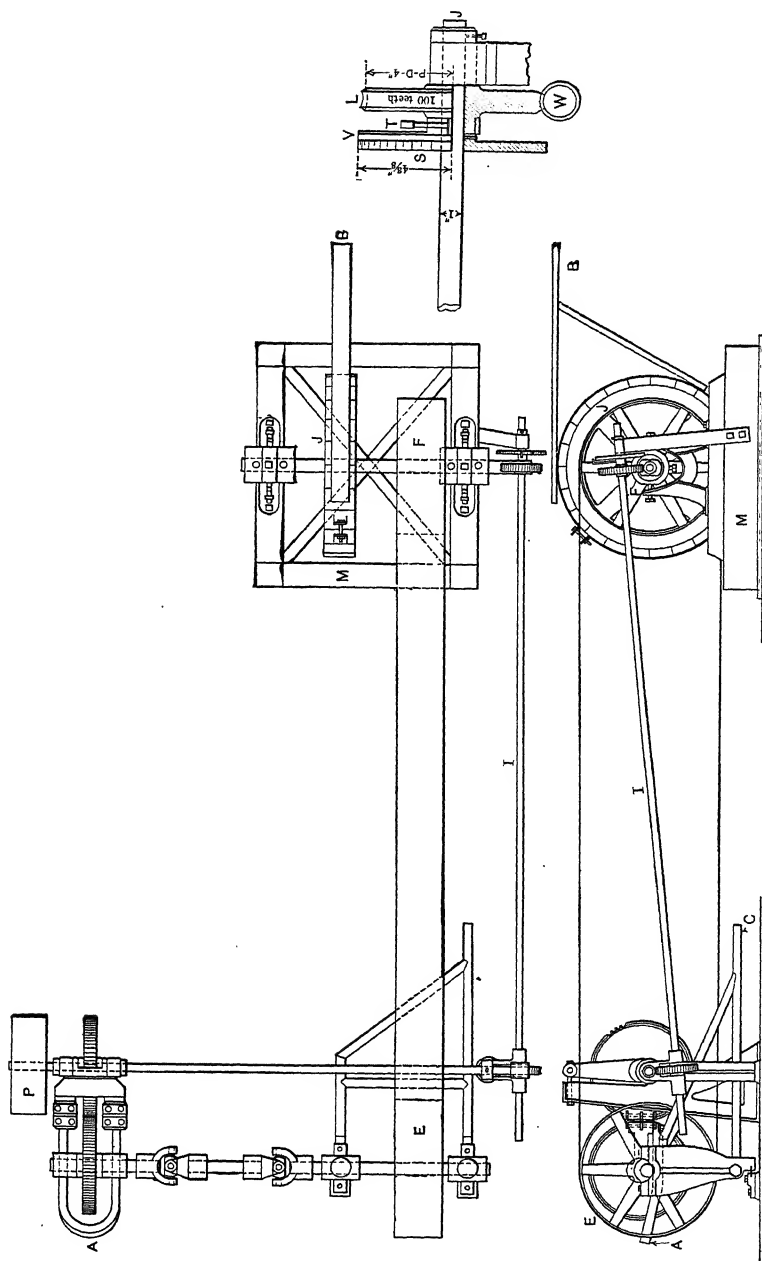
SIBLEY COLLEGE BELT-TESTING MACHINE.
